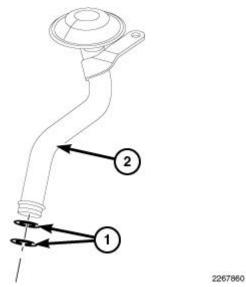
Oil Pickup Tube O-Rings Courtesy of CHRYSLER LLC
